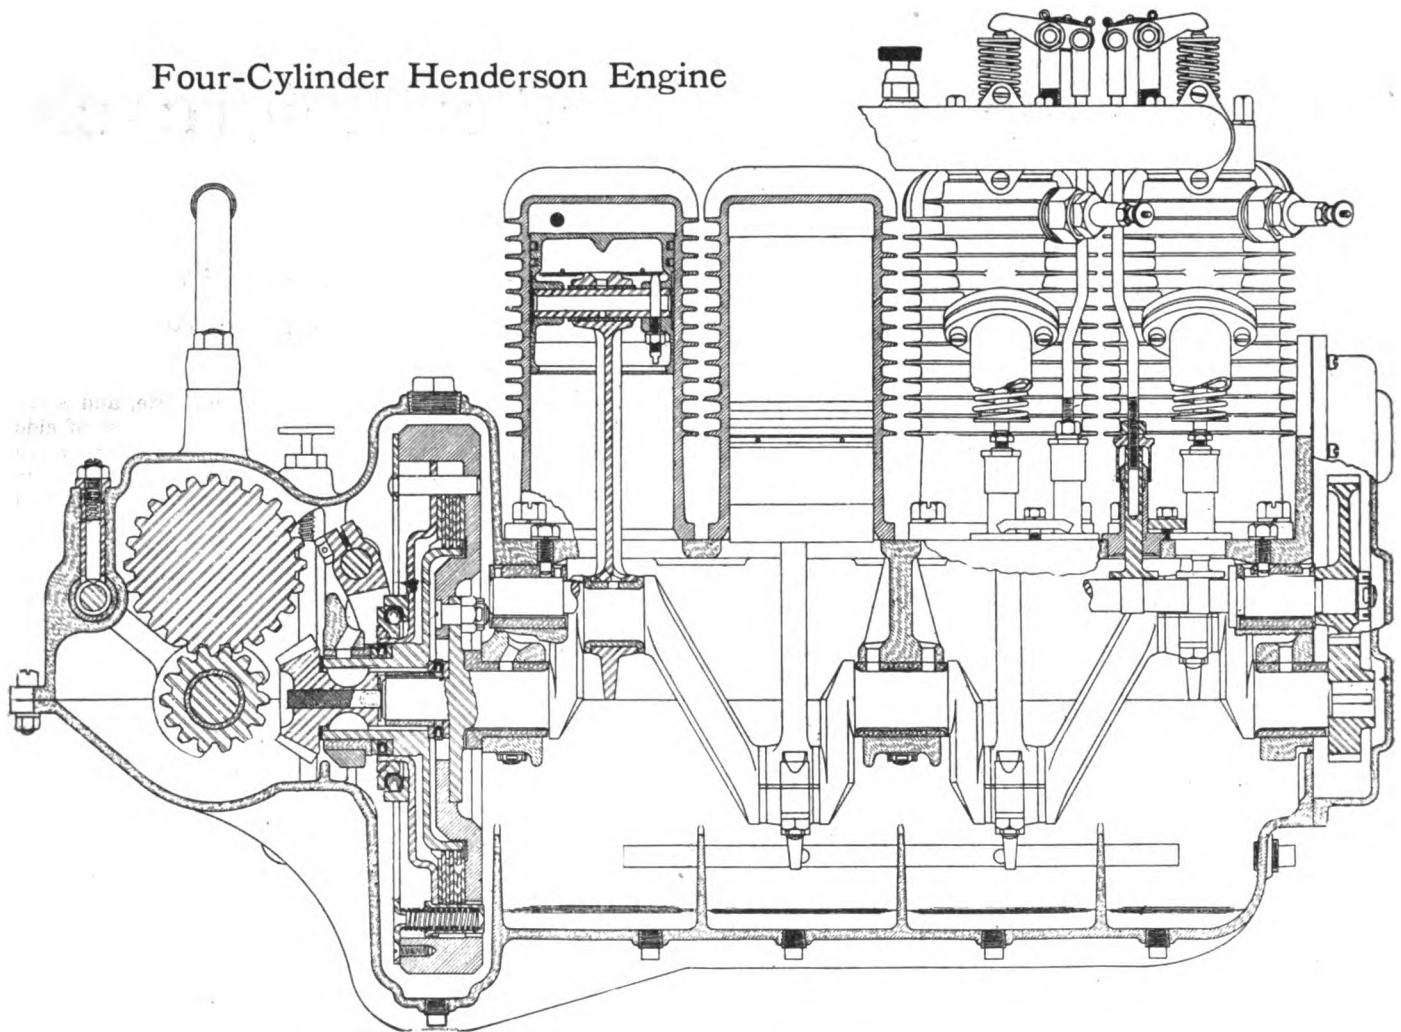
Longitudinal section through Henderson engine, clutch and gearbox
